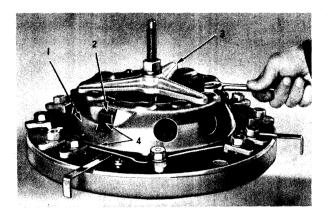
Clutch Cover and Pressure Plate Assembled in Fixture
